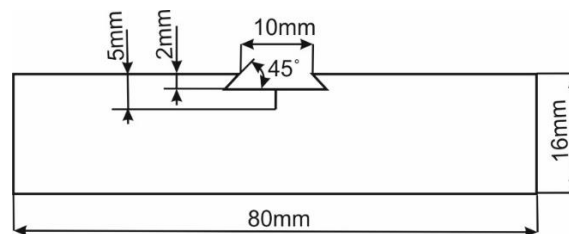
Fracture toughness, SENB specimen geometry and dimensions
